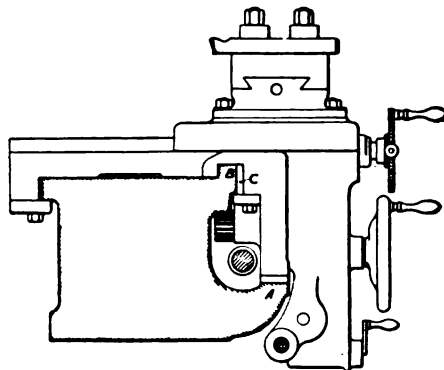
Section through Darling & Sellers lathe bed and carriage.
